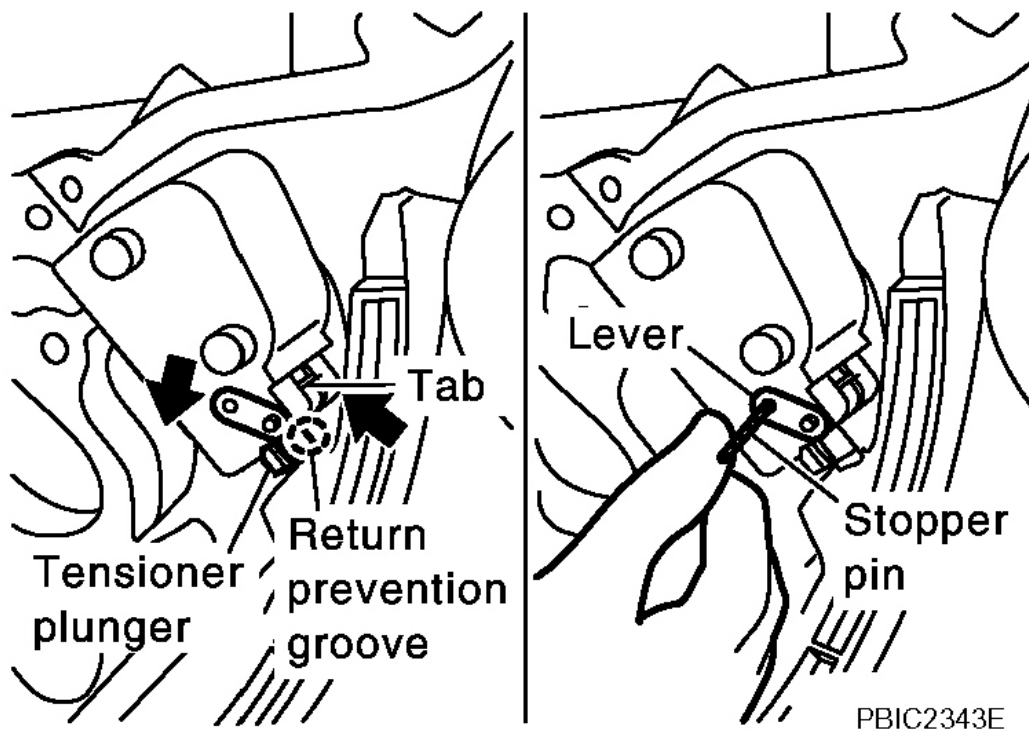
Pressing Tensioner Plunger To Release Tension Of Spring
